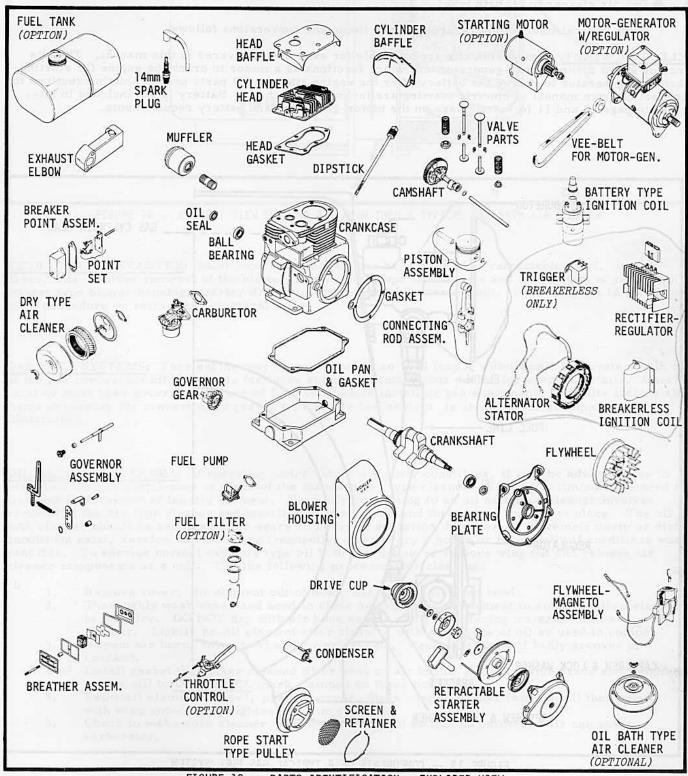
PARTS IDENTIFICATION - EXPLODED VIEW
